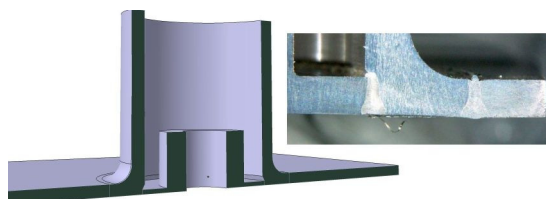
Detail of the CH stem geometry for the welding dummies (left) with grinding pattern of the welding joints after the first E-Beam welding test (right).
